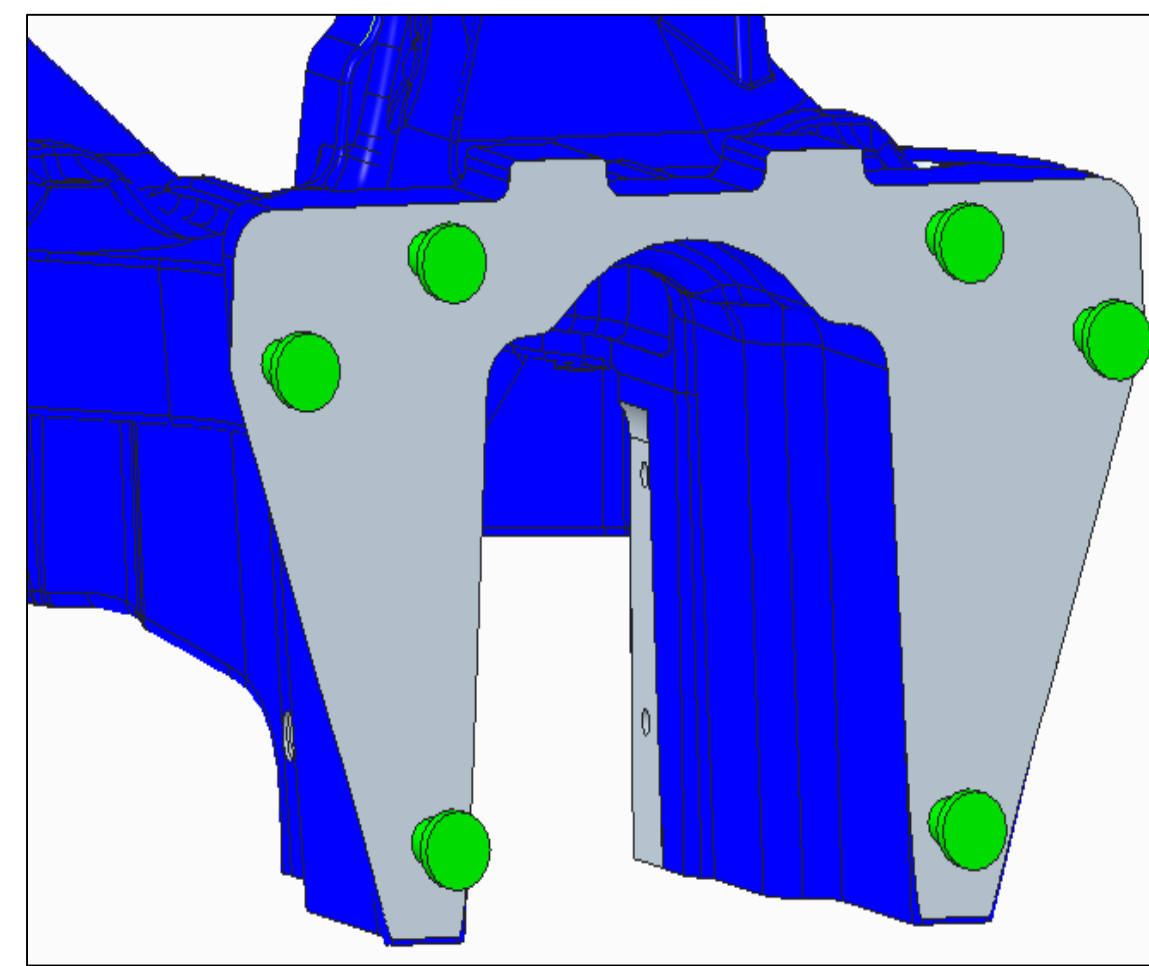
Initial design of sliding keyhole bracket and cast frame rail studs
